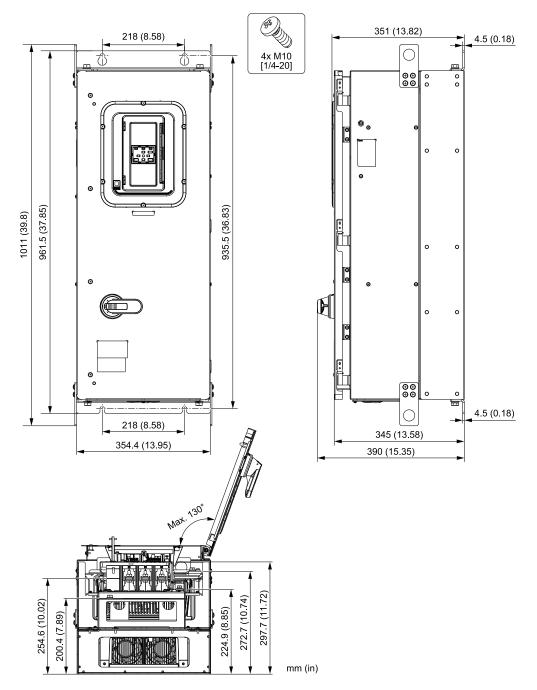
Exterior and Mounting Dimensions Diagram 6
